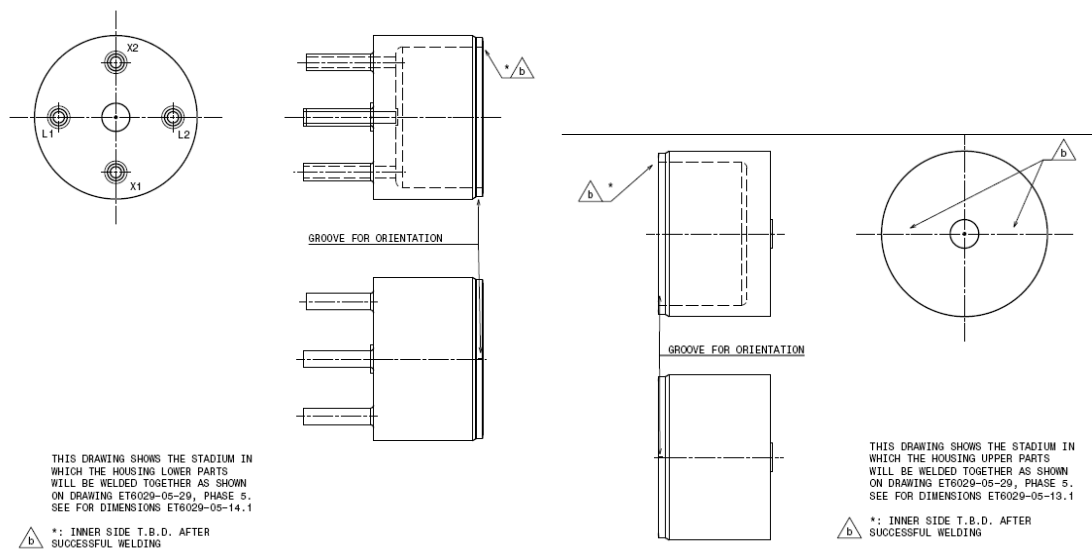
HX FM primary : housing configuration prior to orbital welding step (ref drawing: ET6029-04-DR-032-b-GE-ASM Heat exchanger part 13.1 and 14.1 before welding
